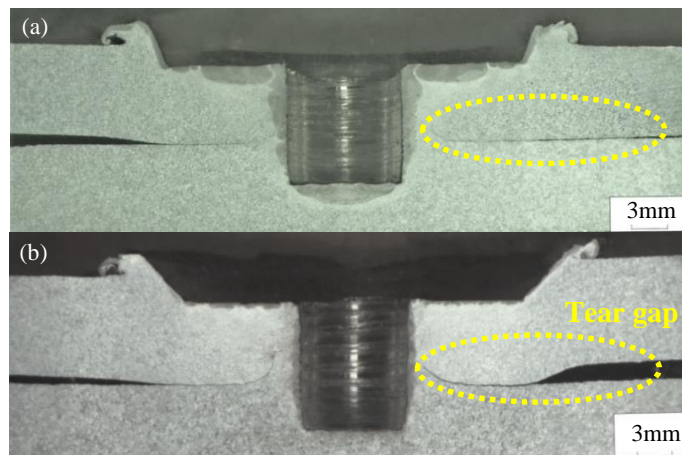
The macrostructure of rotation speed at 380 rpm, welding time 60 sec and depth of plug at (a) 1.0 mm and (b) 1.5 mm
